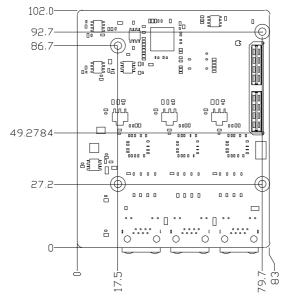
MIOe-220 Mechanical Drawing (Bottom Side)
